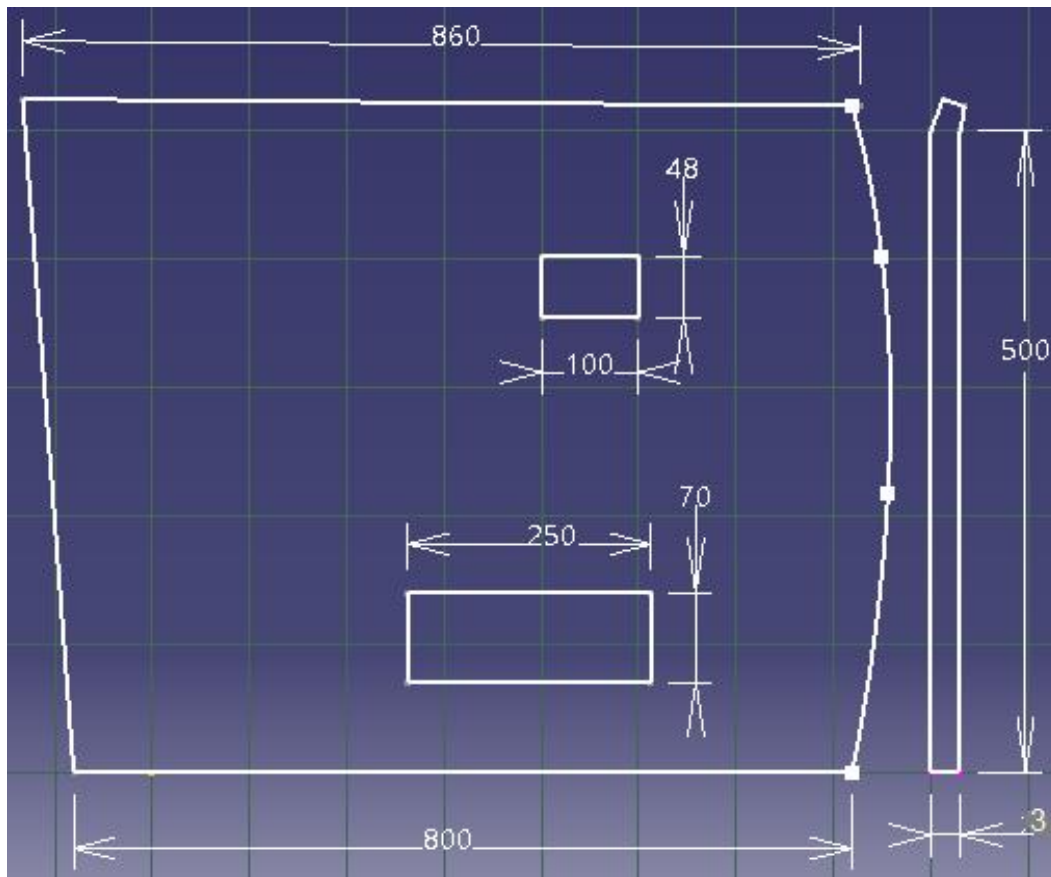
The 2D drawing of the internal door panel (all dimensions are in mm)
